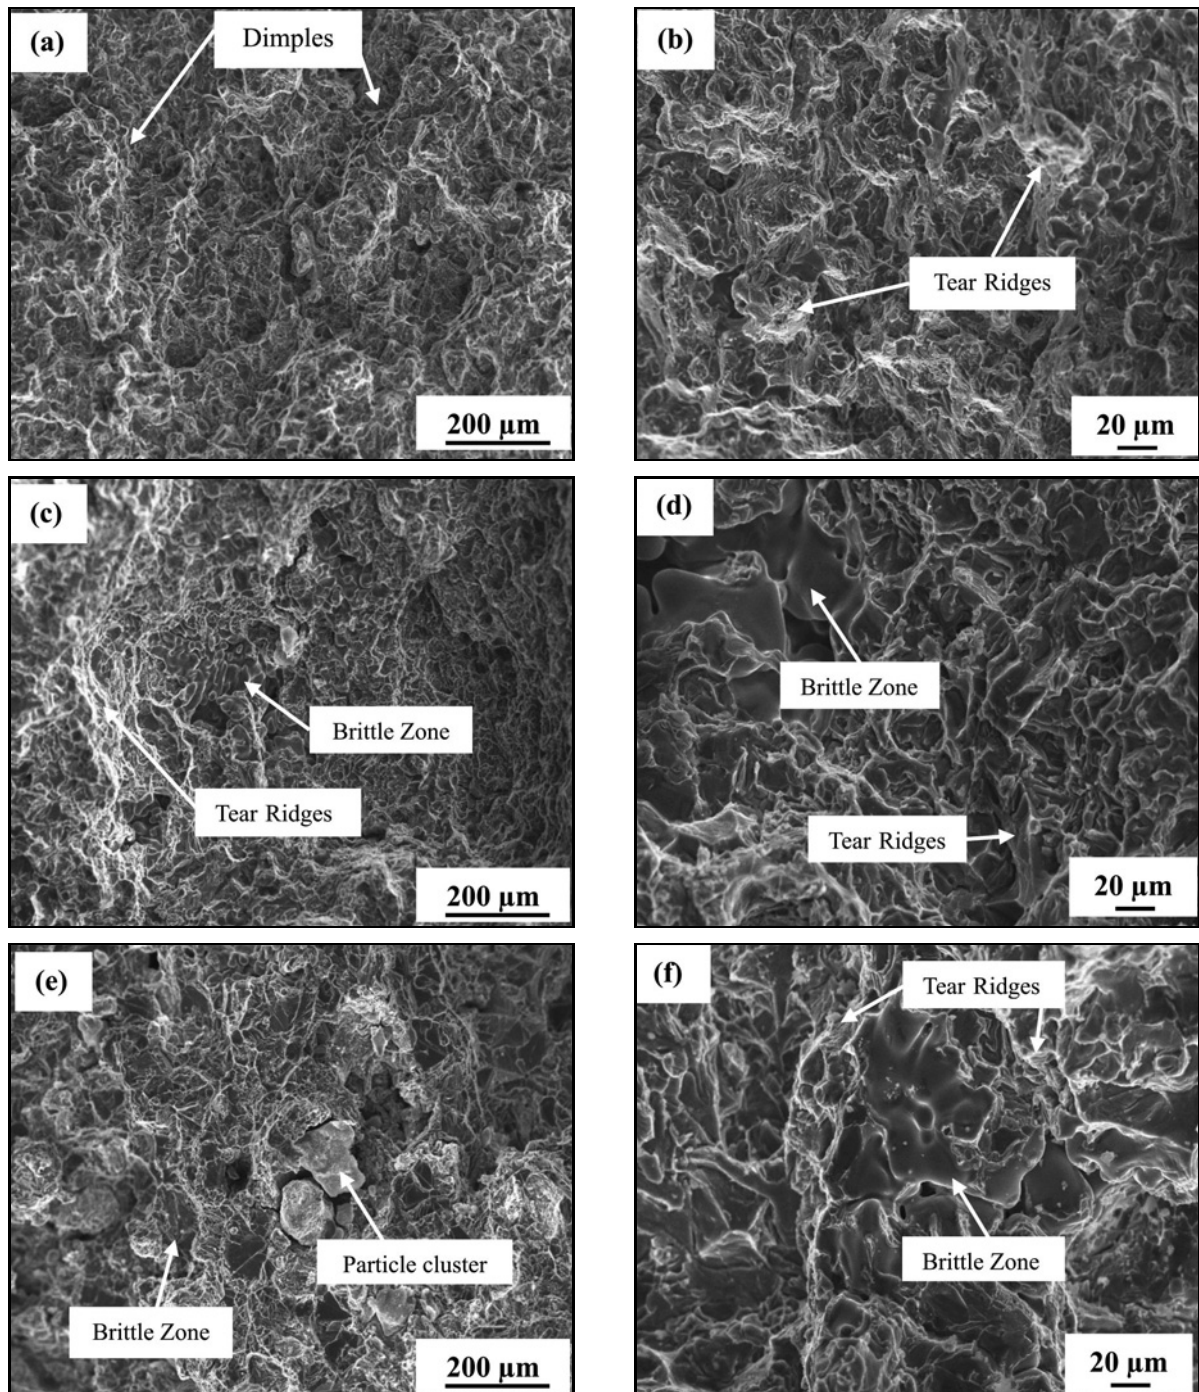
Fracture surface morphology of composite samples: (a) and (b) A3; (c) and (d) A4; (e) and (f) A5.
